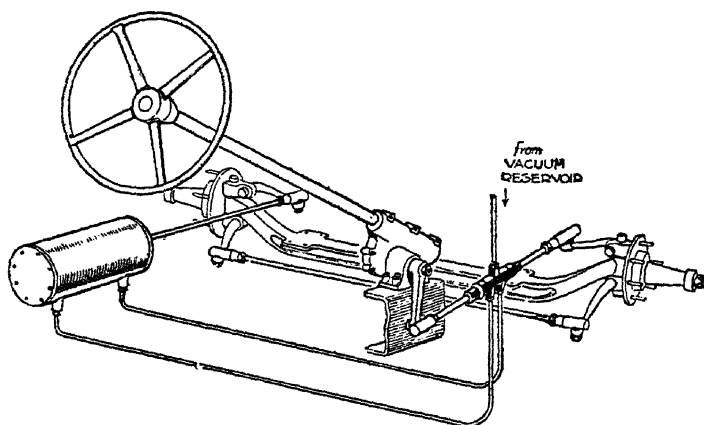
A Method of Power Steering employed on Large Cars and Commercial Vehicles.
